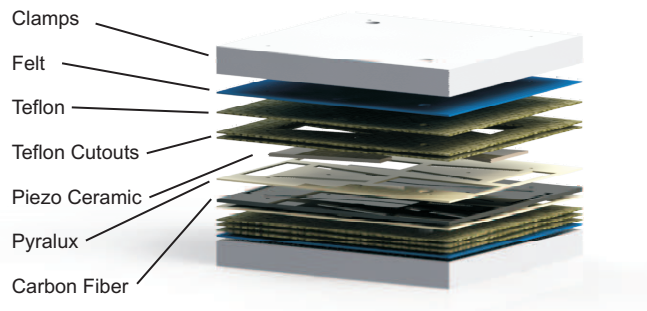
Actuator assembly, method one. Top half called out; bottom half symmetric.
